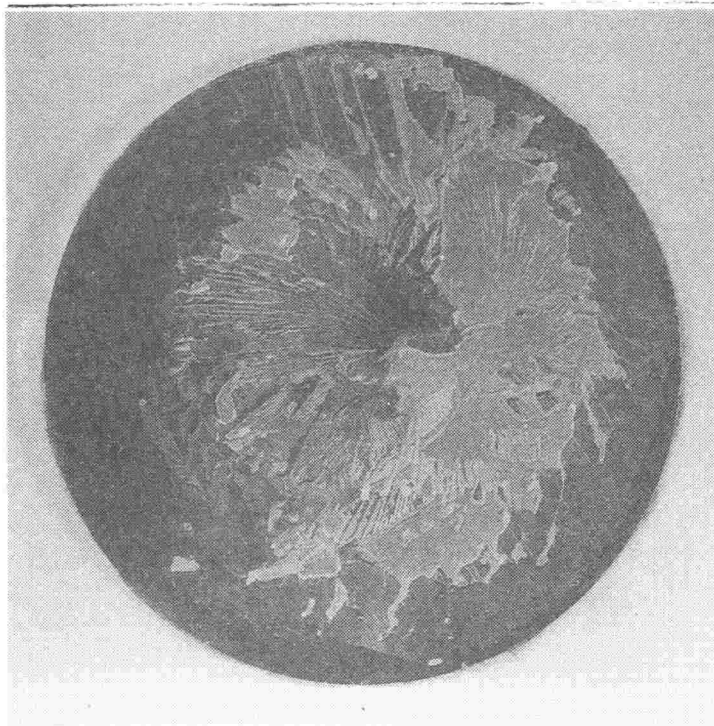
Fracture surface of steel-steel adhesive joint after tension test. (d=28mm)
